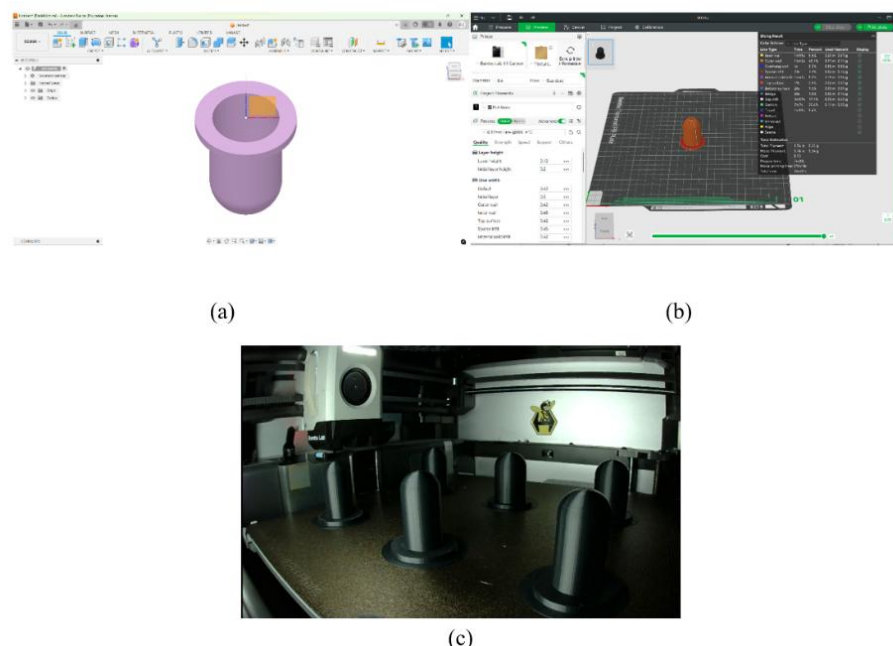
Build 3D prototypes. (a) modelling the prototype in Fusion 360 software. (b) Configuration 3D printing parameters in Bambu Studio Software. (c) Printing the prototypes in Bambu Lab X1 Carbon.
